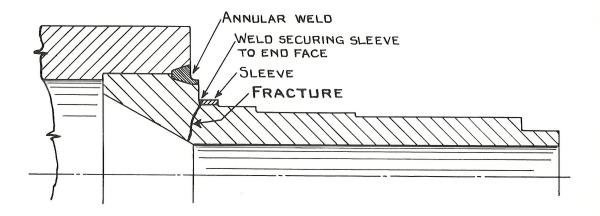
Failure of a Steam Heated Roll Caused by Welding on Repair Sleeve.
